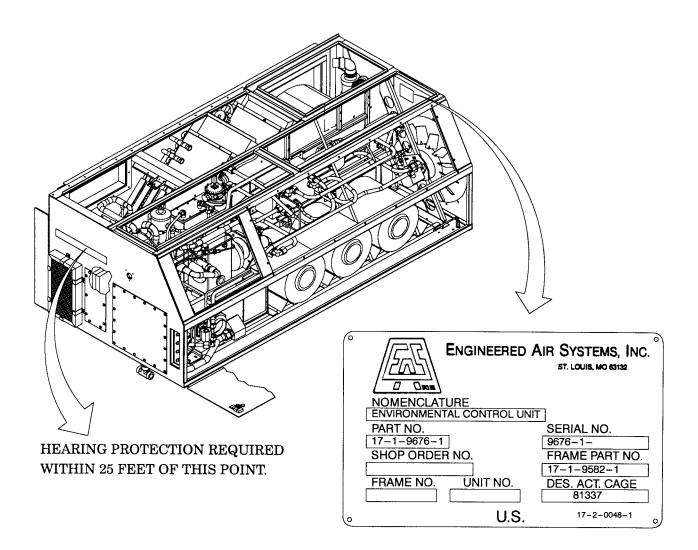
Decals and Instruction Plates (Sheet 7 of 10)
